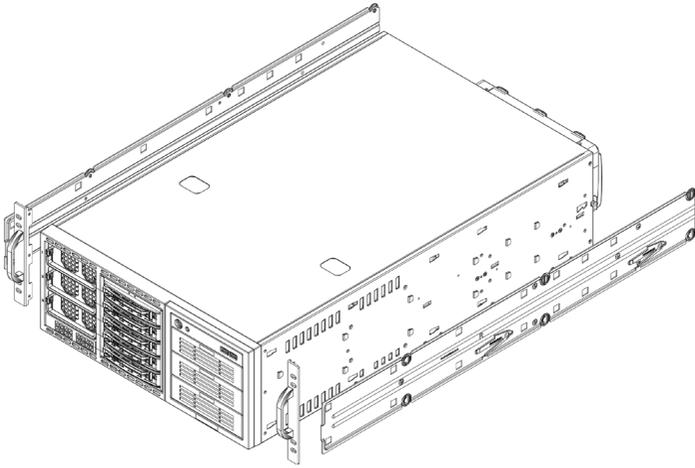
Identifying the Inner Rails and Chassis Handles
